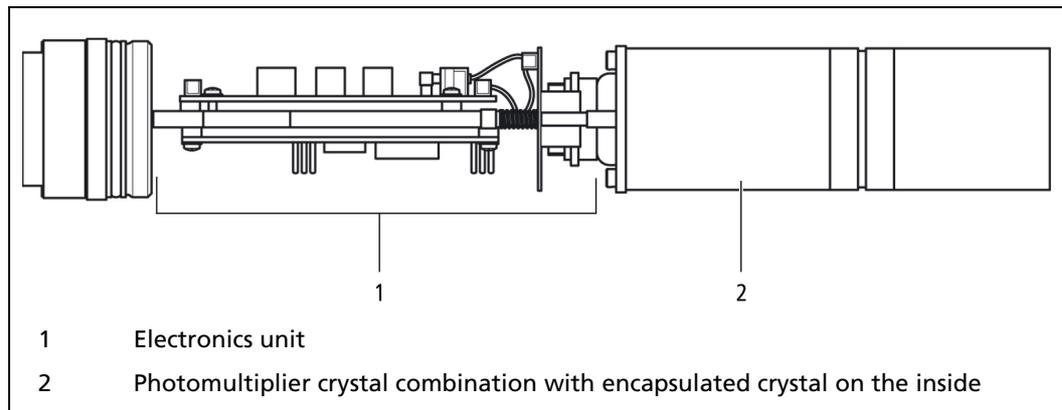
GAMMAcast detector LB 6739 Csl 40/50 without housing pipe
